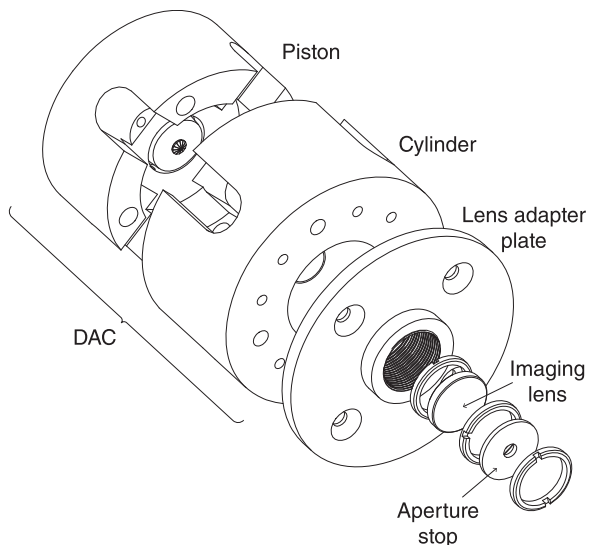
Exploded view CAD model showing the imaging lens attached directly to the diamond anvil cell (DAC) via the lens adapter plate. The cylindrical nose of the lens adapter plate centers the DAC on the axis of the apparatus.
